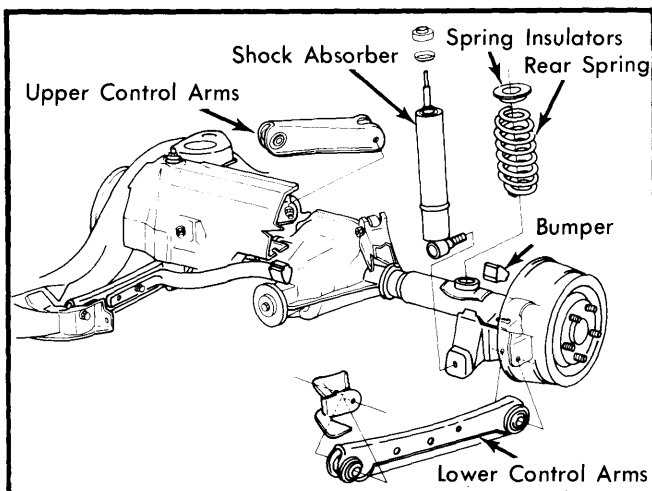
Coil Spring Type Rear Suspension Assembly (Ford, Mercury, Lincoln & Mark VI)
